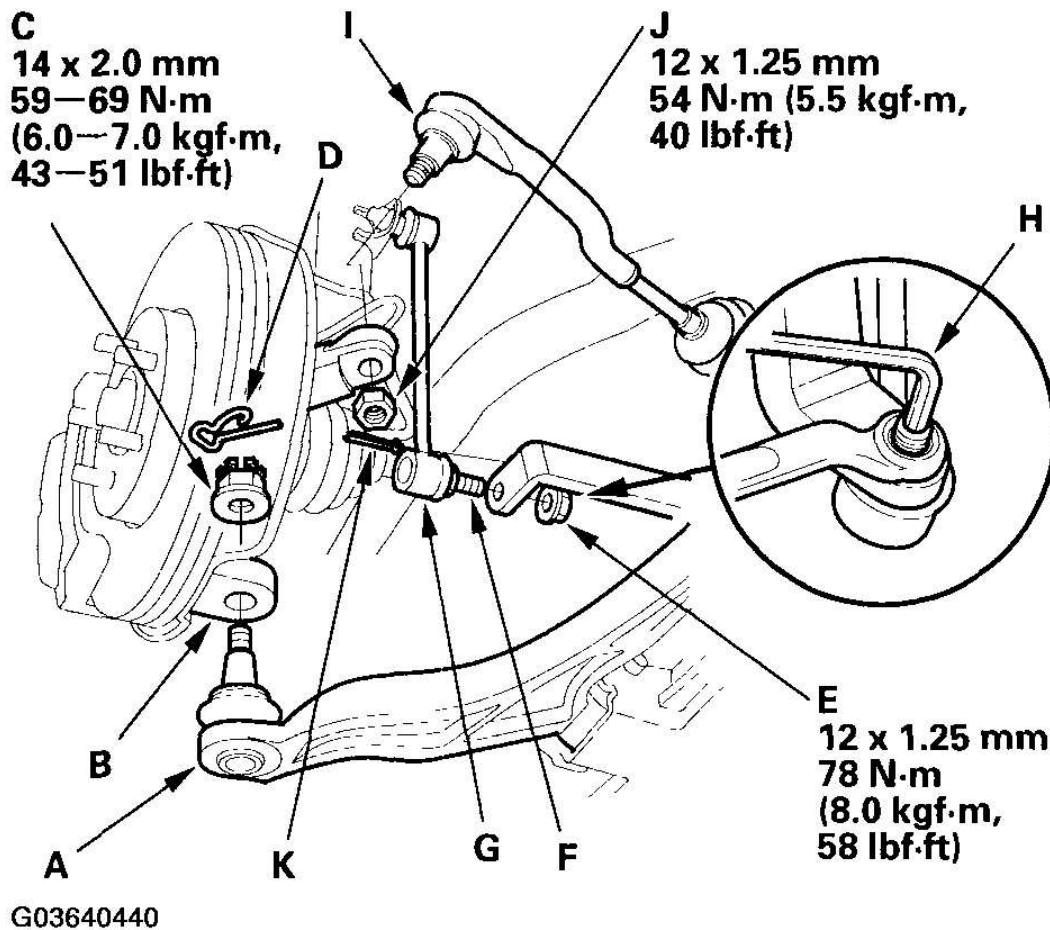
Installing Ball Joints On Each Lower Arm To Each Knuckle
